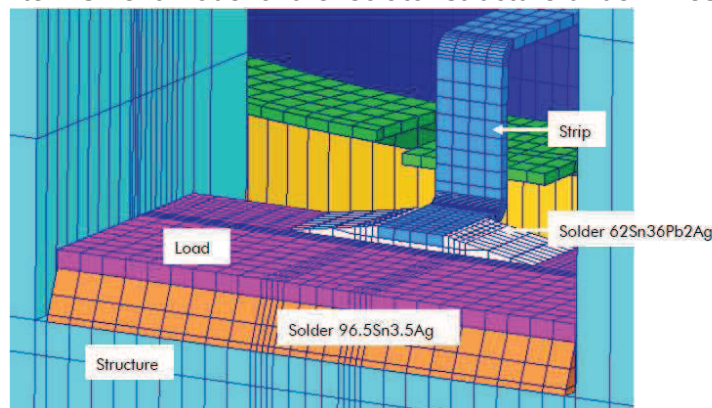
Zoom on the solder area (chip load to housing and strip to load assembly)
